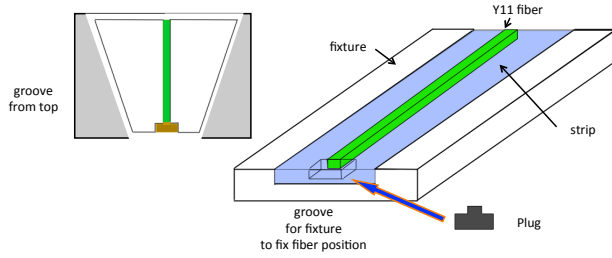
Schematic of holding the scintillator strip in a fixture for mounting the MPPC to the Y11 fiber.
